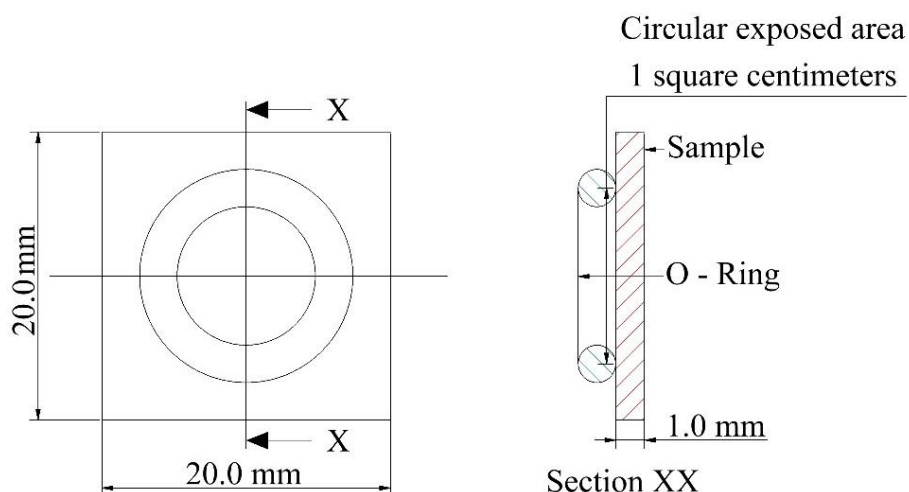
Dimensions of HMT sample assembled with O – Ring.
